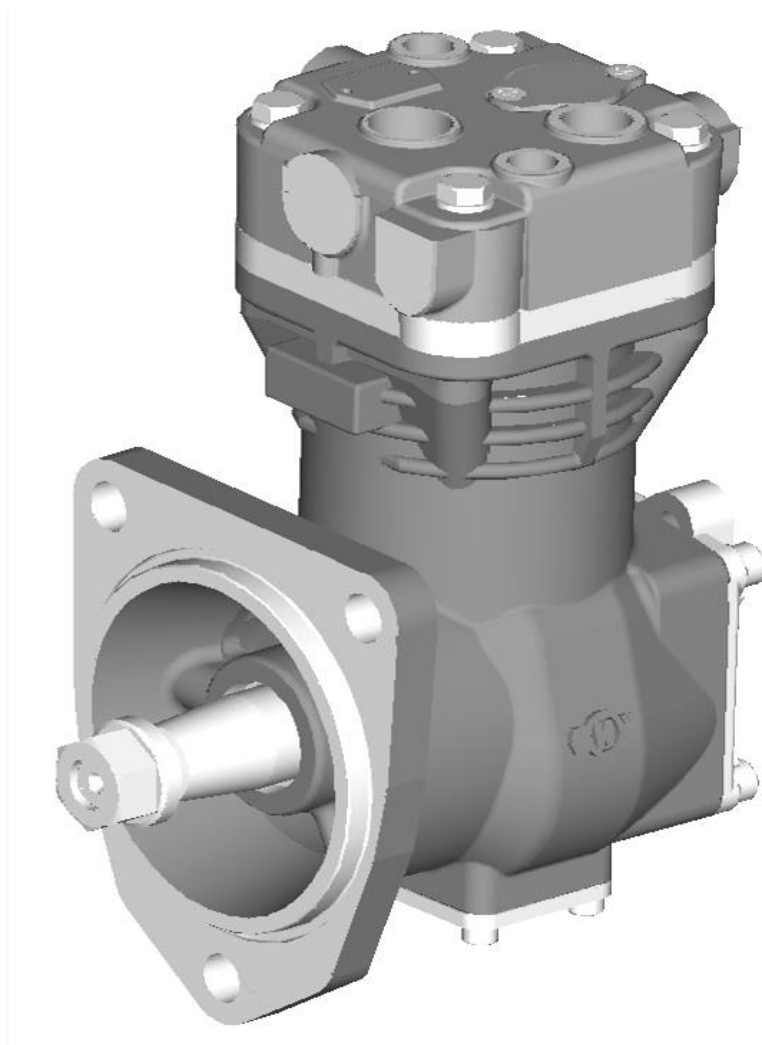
Single Cylinder Reciprocating Type Compressor
